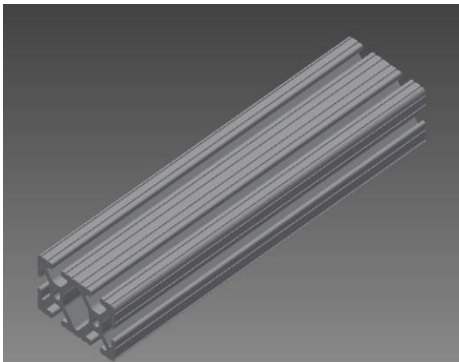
T-slot bar .CAD draft of T-slot for tilt mechanism in the mechanical system.
